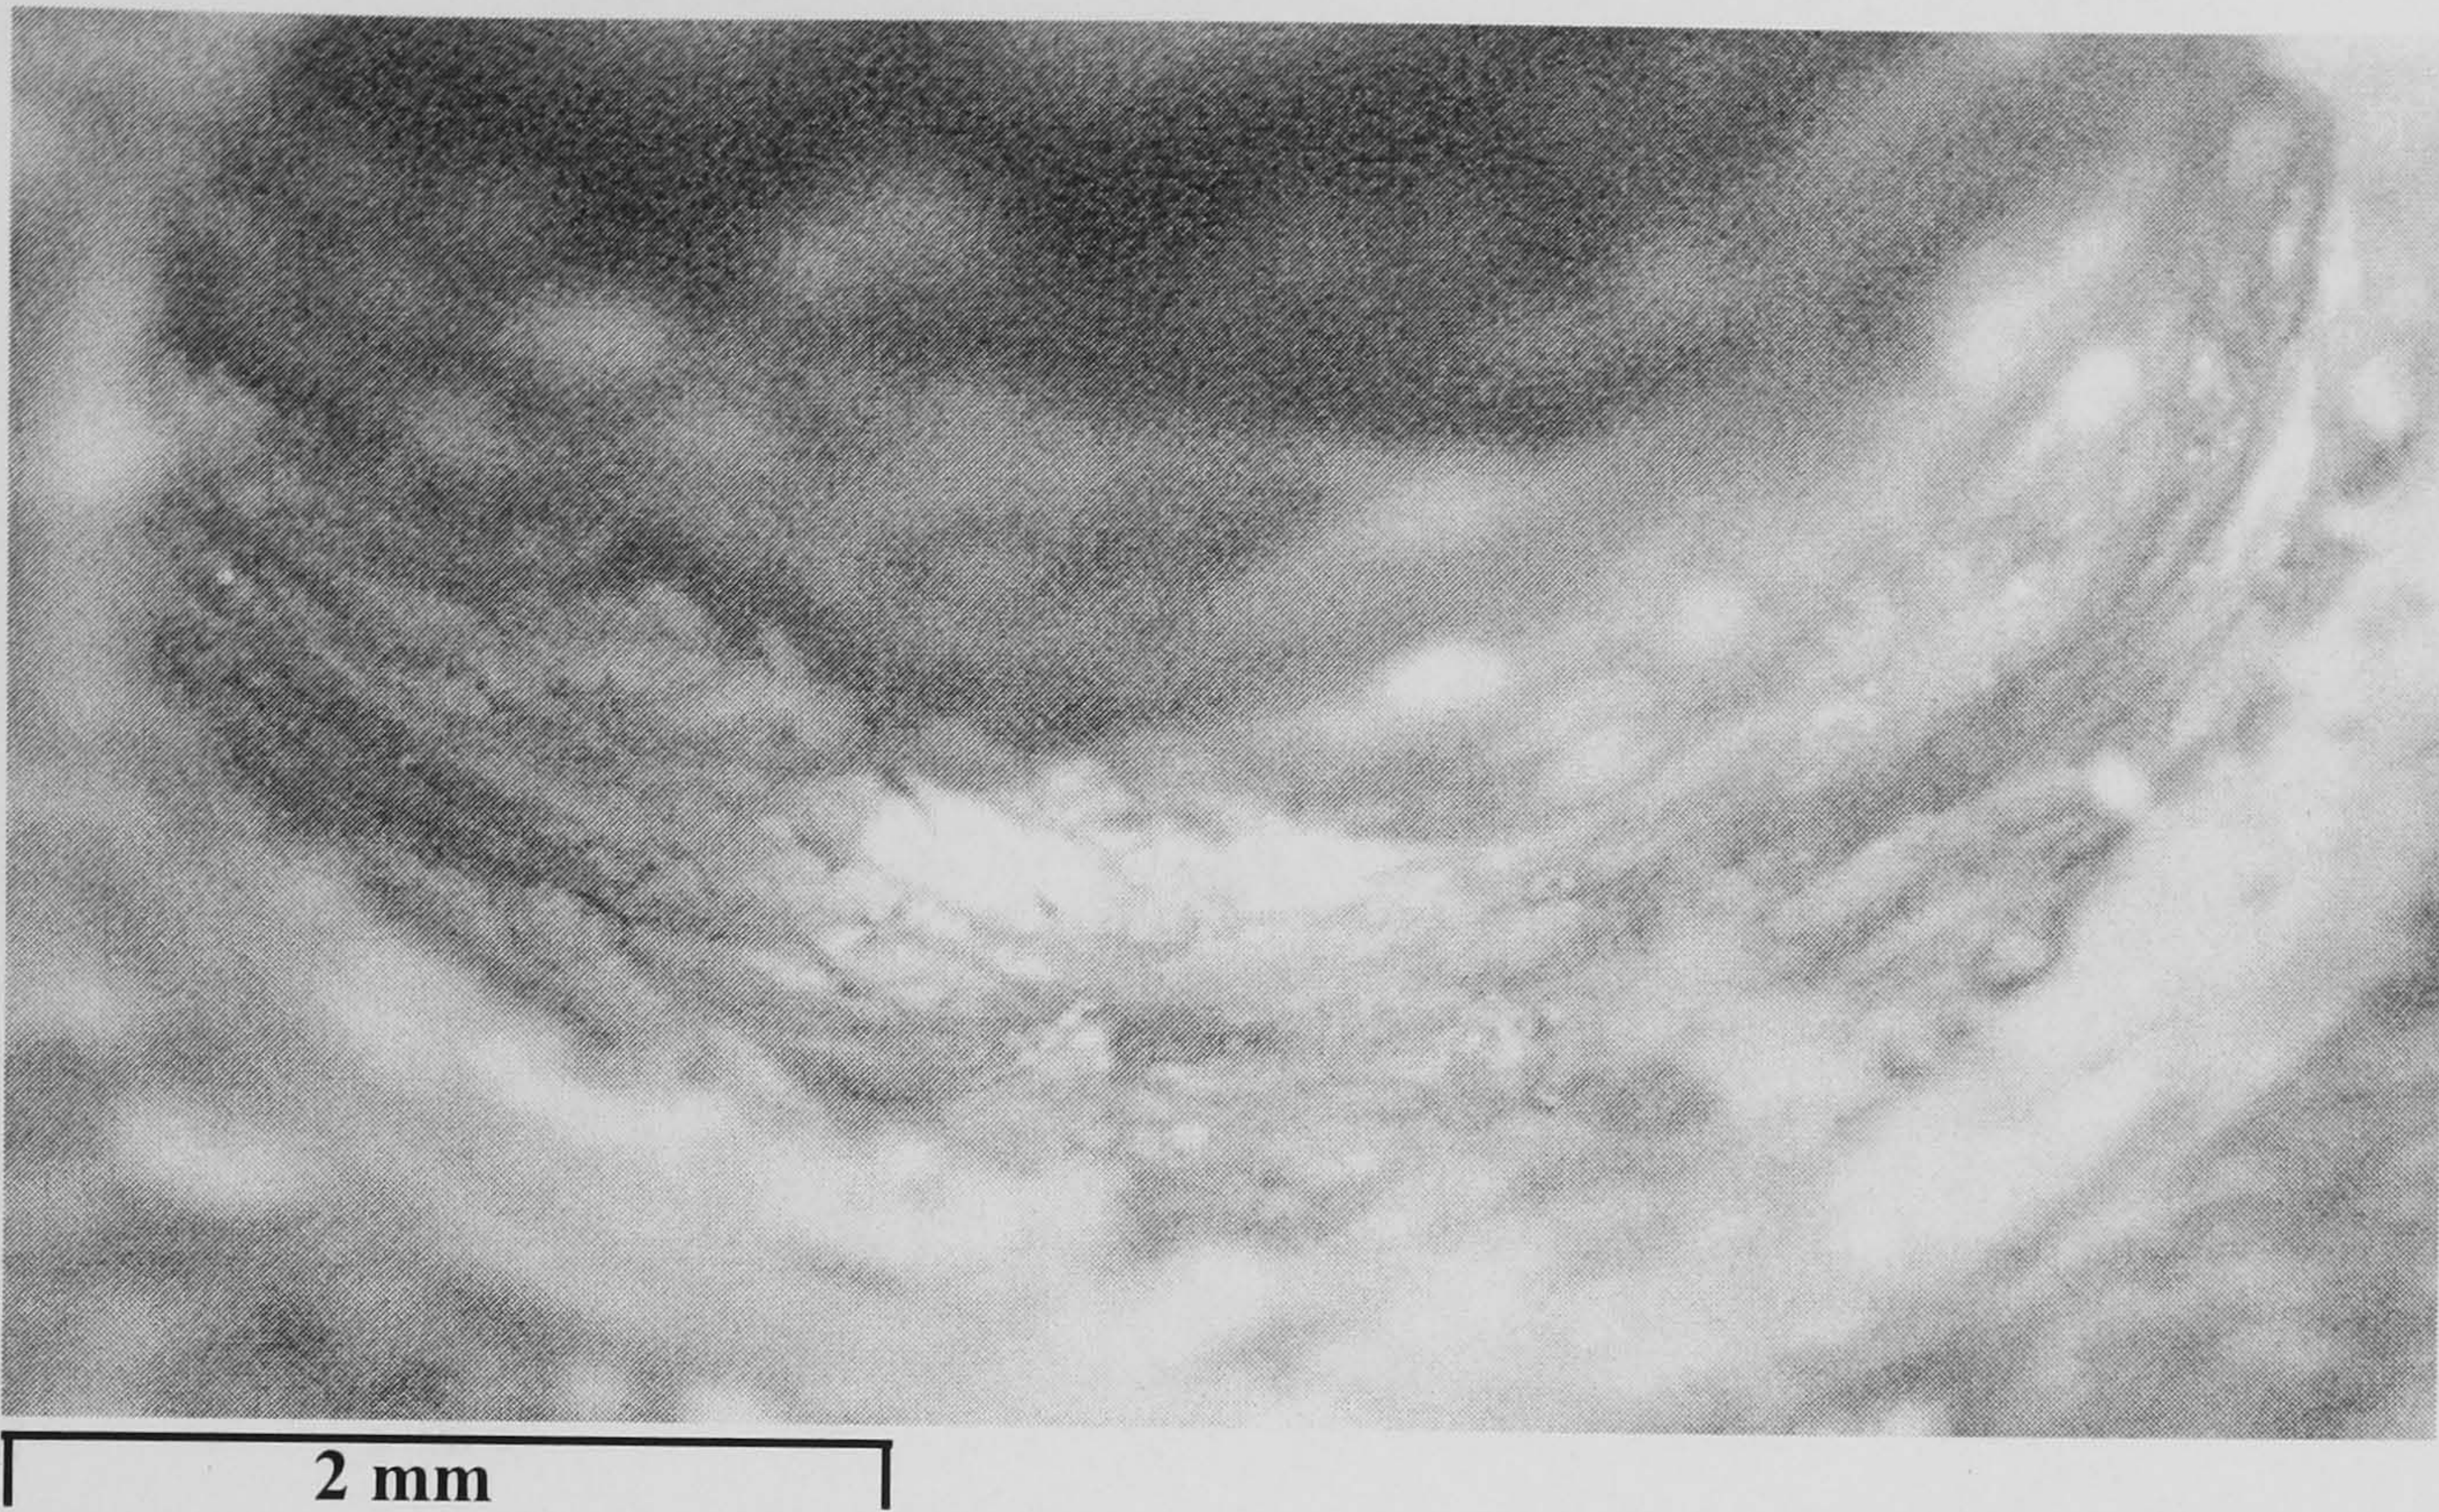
Optical micrograph showing the corrosion product inside the hole surface after 4 weeks.
